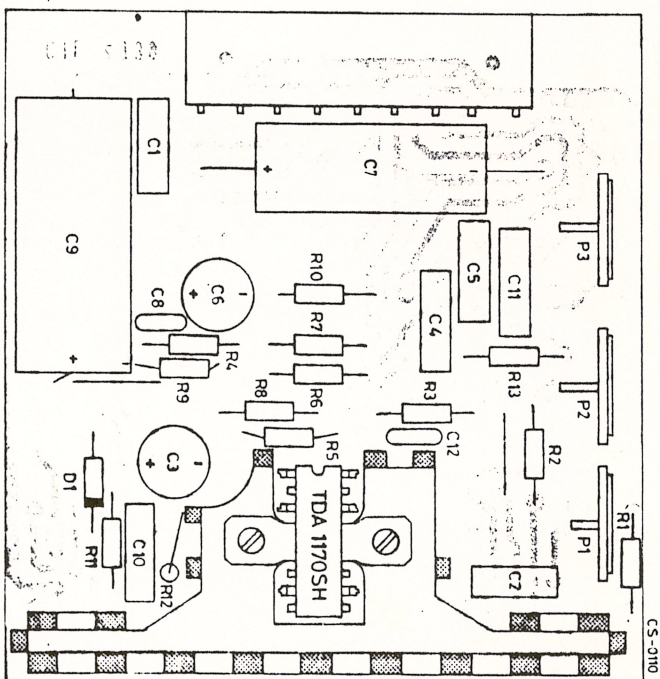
P.C. board and component layout of the circuit of fig. 6 (1 : 1 scale)
